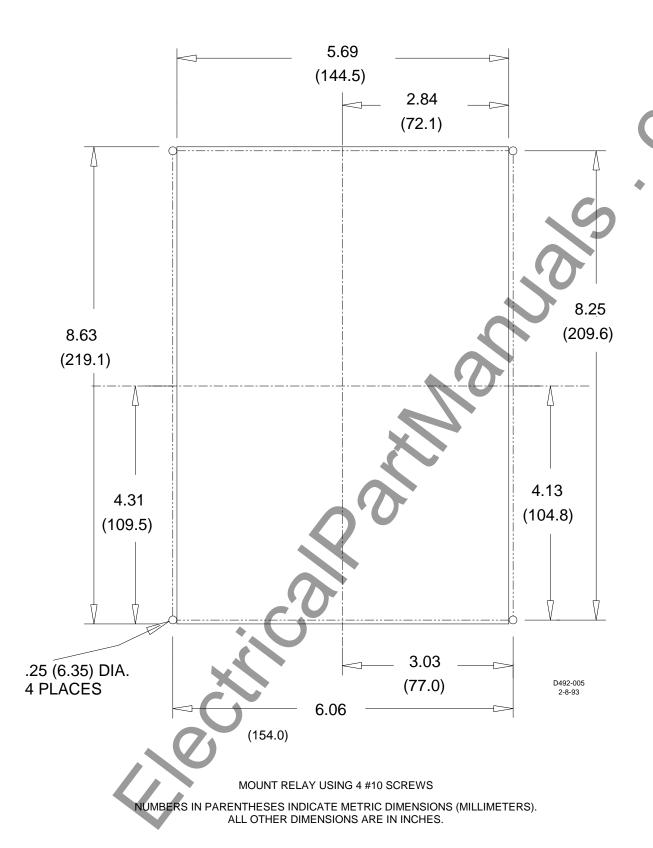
Panel Drilling Diagram (Flush Mounting)
